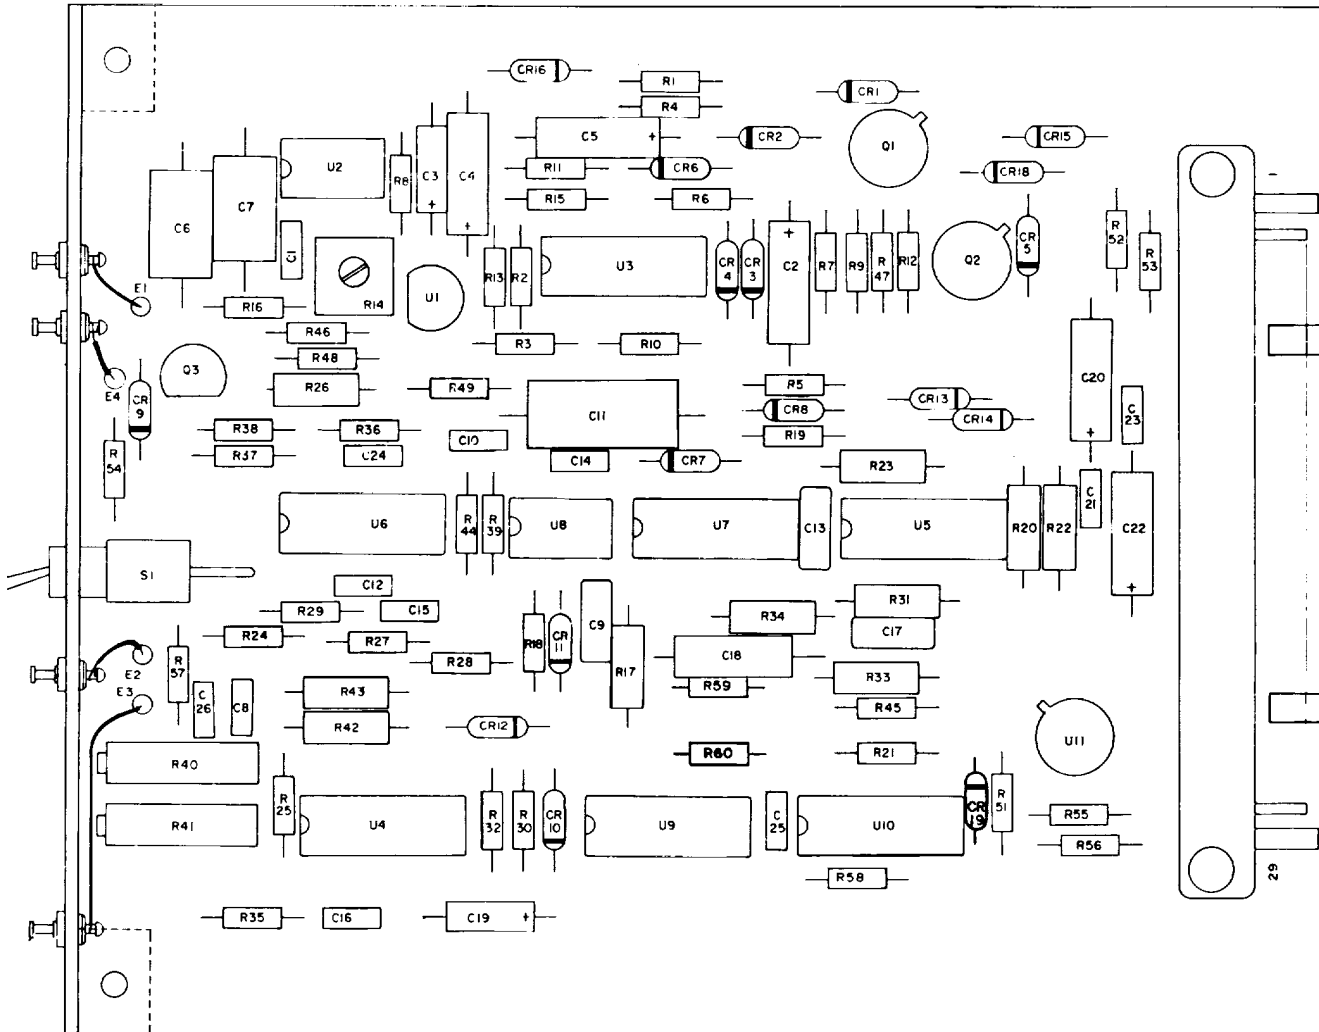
Reference Ident Circuit Card Assembly, 1A3A4 Parts Location Diagram
